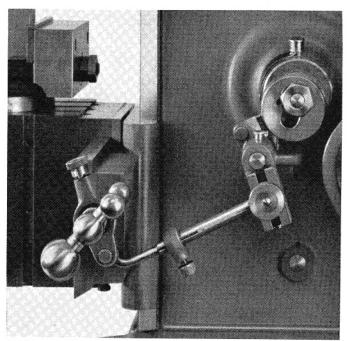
Showing Clamp Nut and Horizontal Table Feed.
